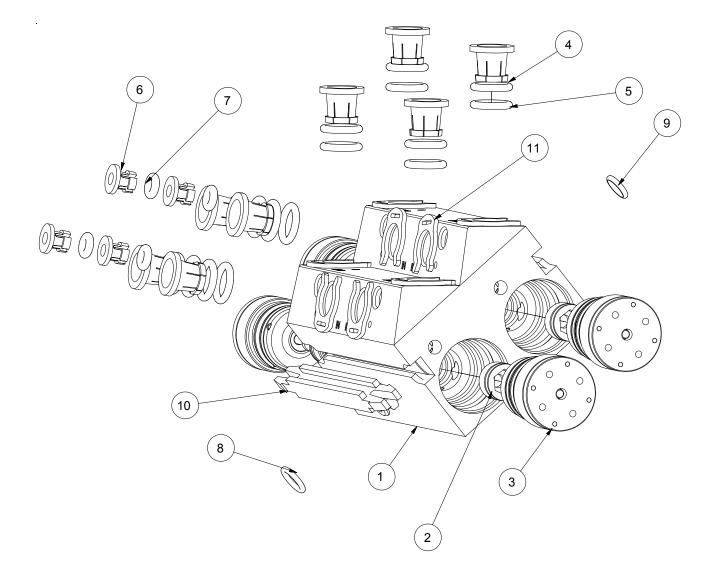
A10729 (Metric) & A10960 (English) 4-Color Valve Circulating Assembly
